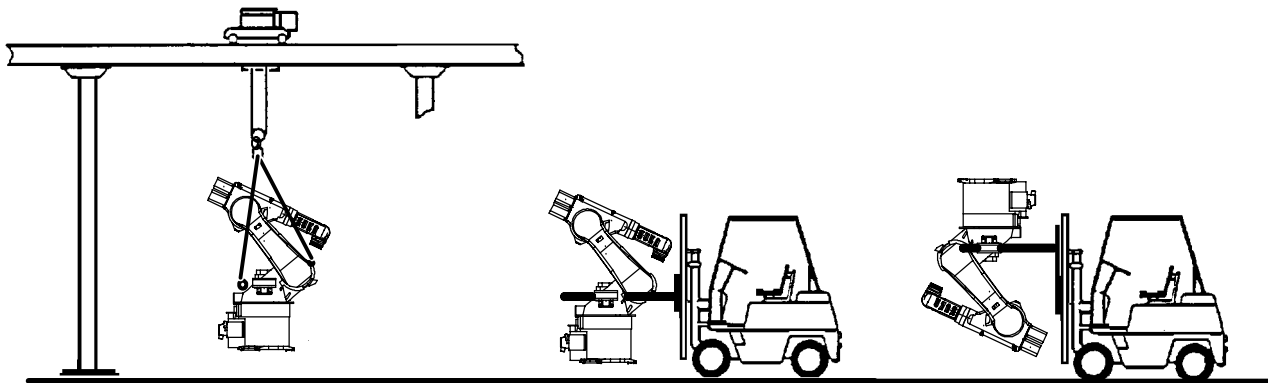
Transporting floor-mounted and ceiling-mounted manipulators
